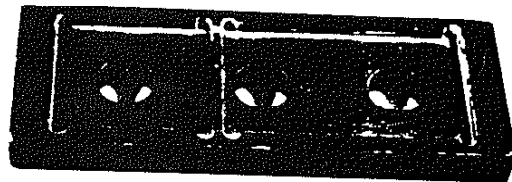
Photograph of A Fixture for Spot Weld Preparation.
